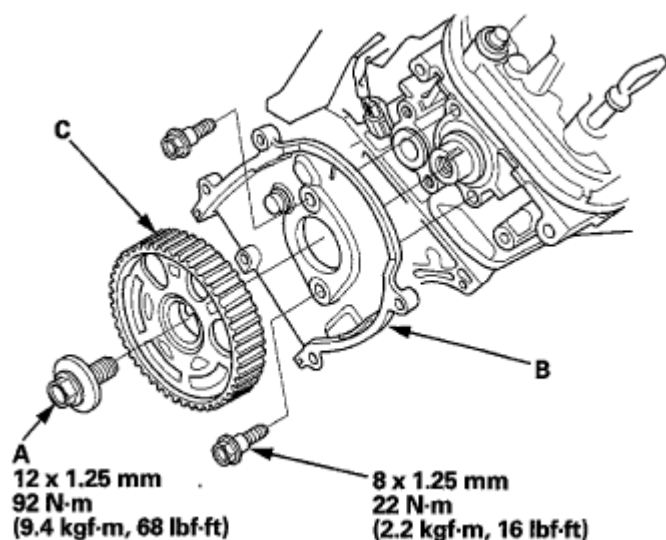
Identifying Back Cover, Camshaft Pulley And Camshaft Pulley Mounting Bolts Torque Specification
